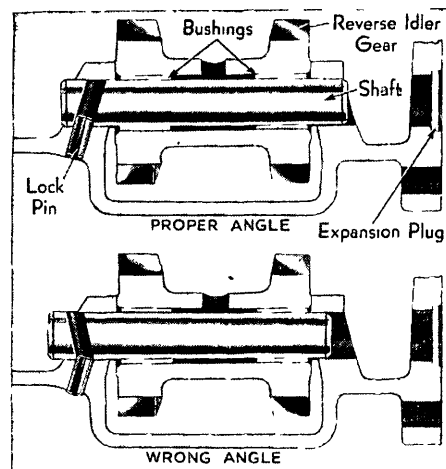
Reverse idler gear, shaft and lock pin. 1937-52
